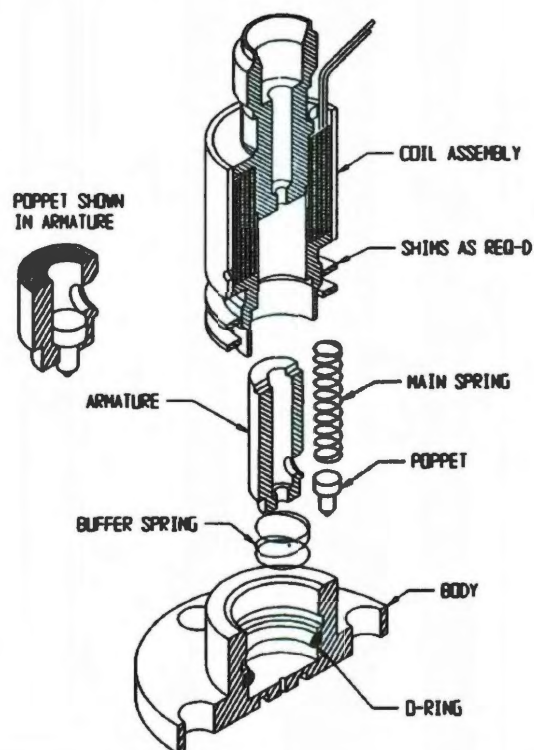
A dosing valve schematic showing the poppet and coil assembly.
